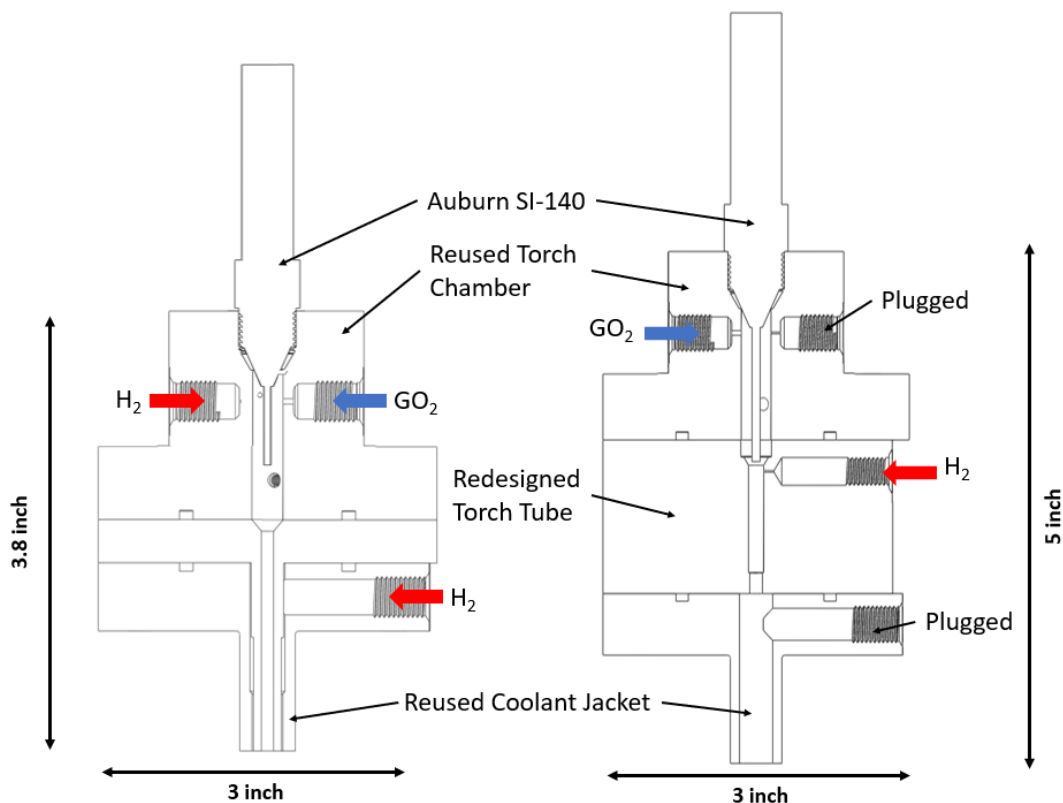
Initial Torch Design [Left] and redesigned Torch Igniter Configuration [Right].
